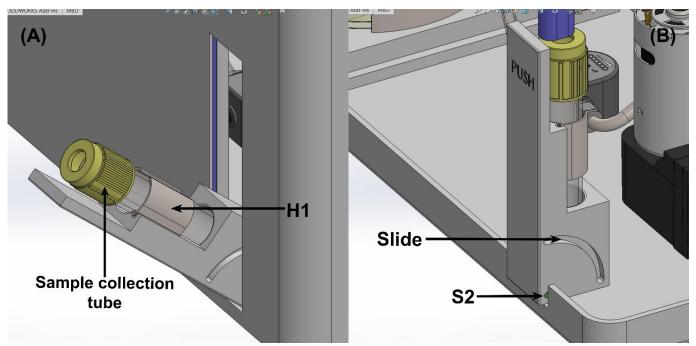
(A)Open position with sample collection tube, (B) closed position with sample collection tube of automatic sample collection tube holder.
